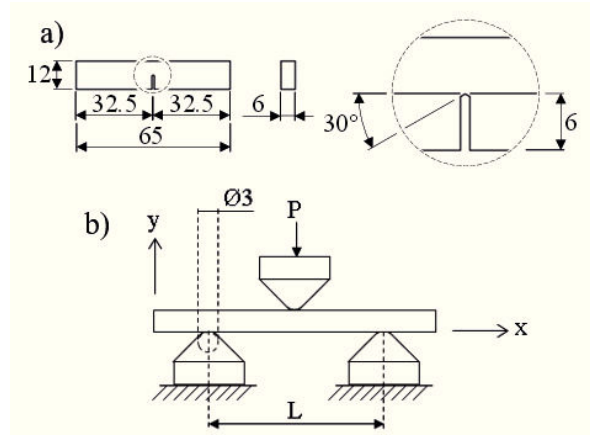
Bending tests: a) geometry of the specimens for fracture toughness tests; b) schematic representation of the loading ($L = 40$ mm).
